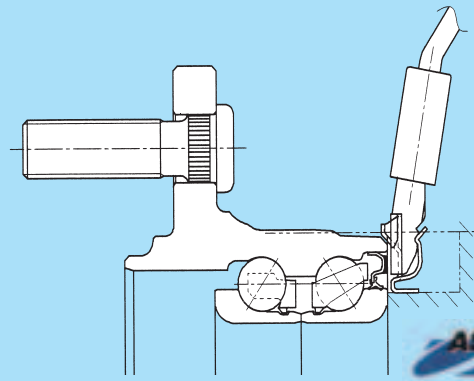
HUB II bearing with the multi-pole magnetic encoder seal
